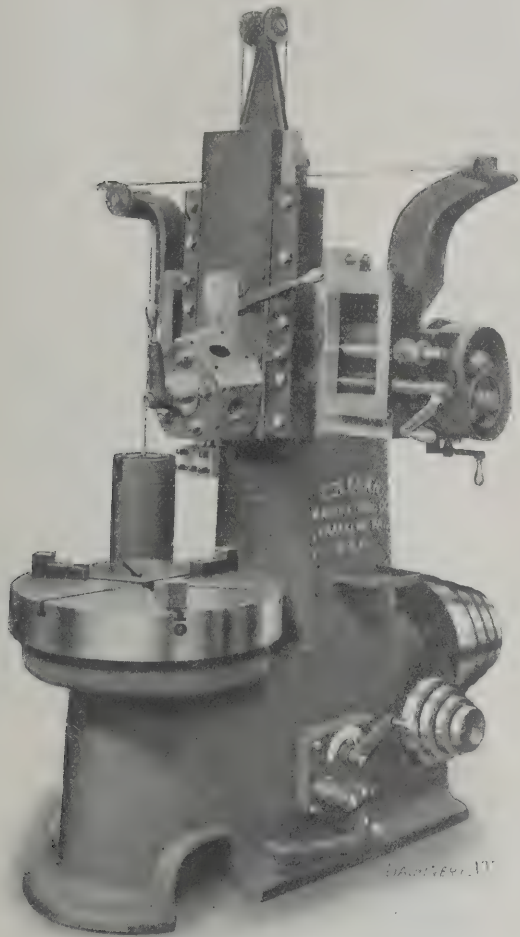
Thirty-inch Vertical Boring Mill, built by the Colburn Machine Tool Co.
